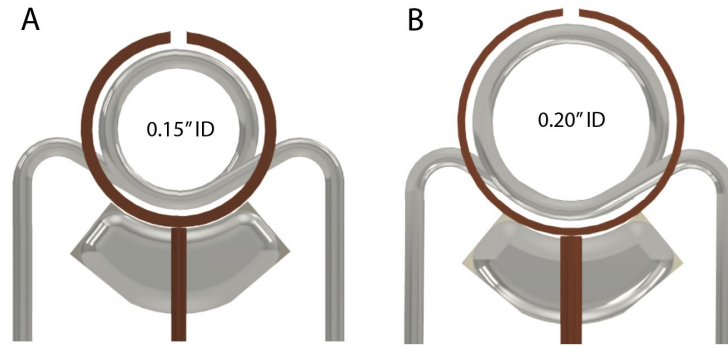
CAD drawings of the cross-coil system. A) Original, B) Proposed redesign with a larger inner diameter.
